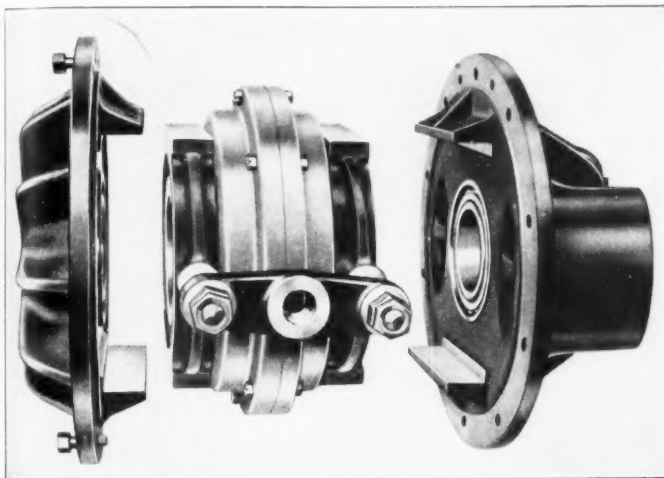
Floating ring assembly and pump covers showing the guide block supports on the covers of the Hele-Shaw pump.
